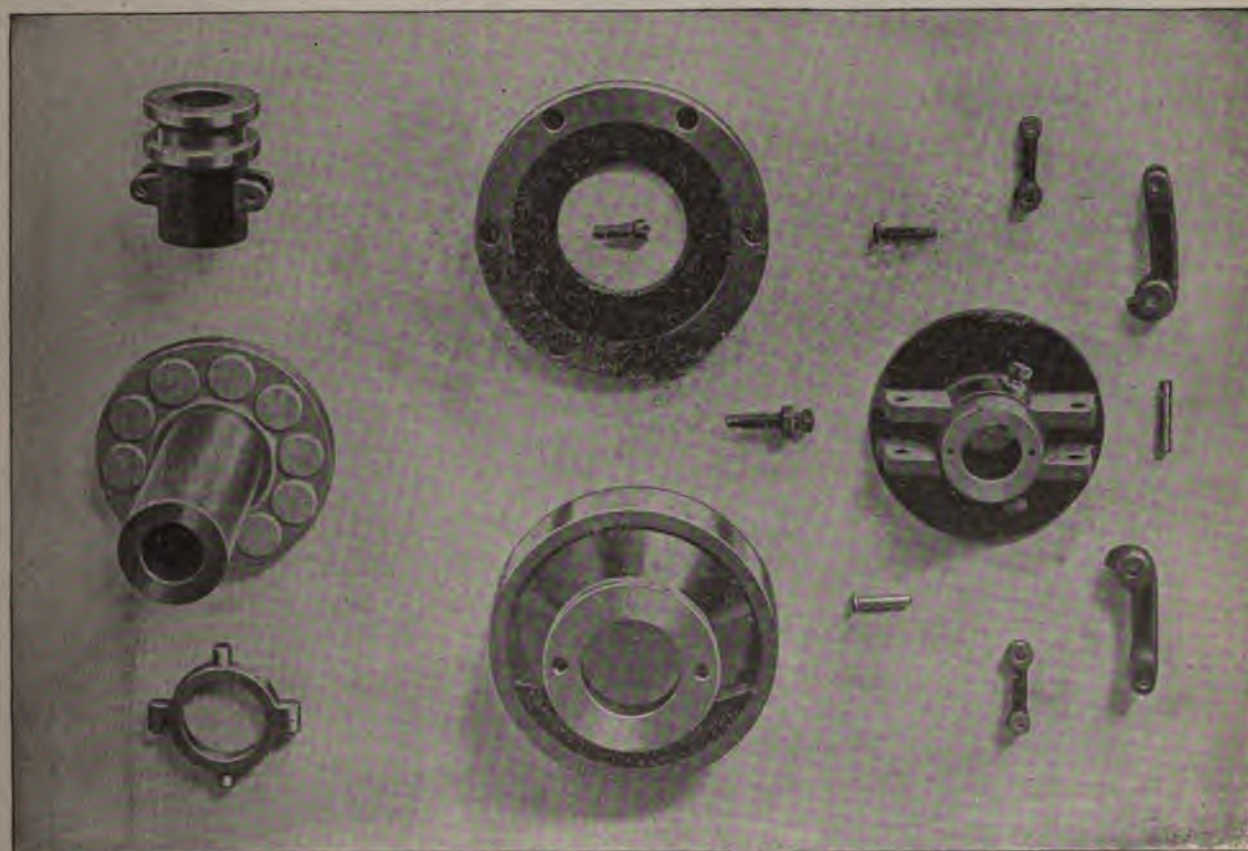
PARTS OF THE B. & C. CLUTCH.
